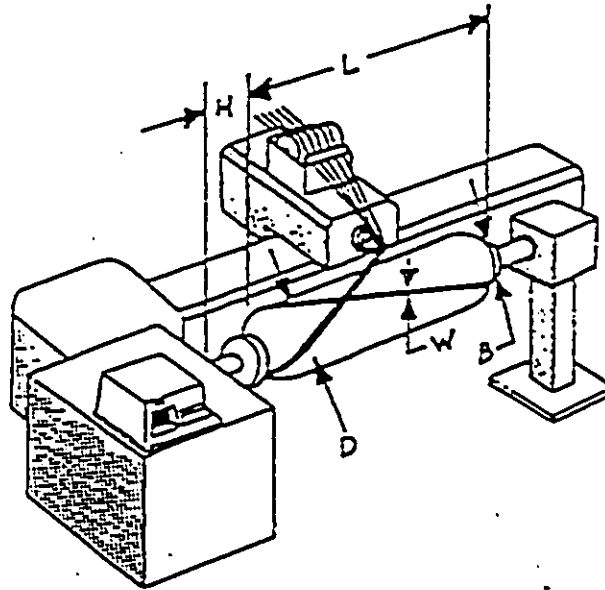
Typical Helical Winding Pattern CNC Machine [10]
